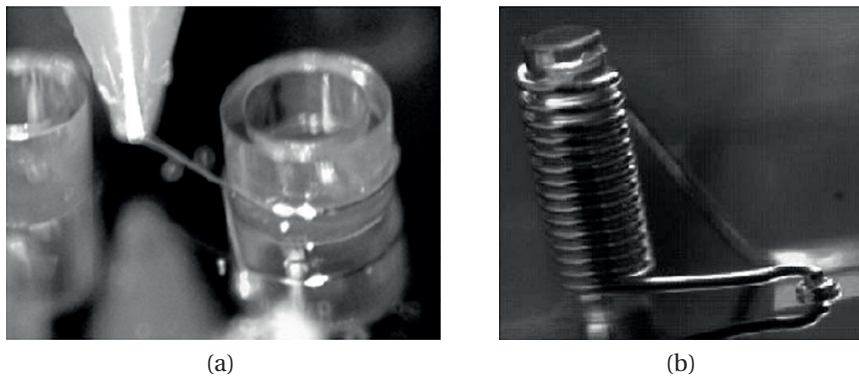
Wire bonder manufacturing technique [BKB⁺09]: (a) copper conductor wiring and (b) a completed coil.
